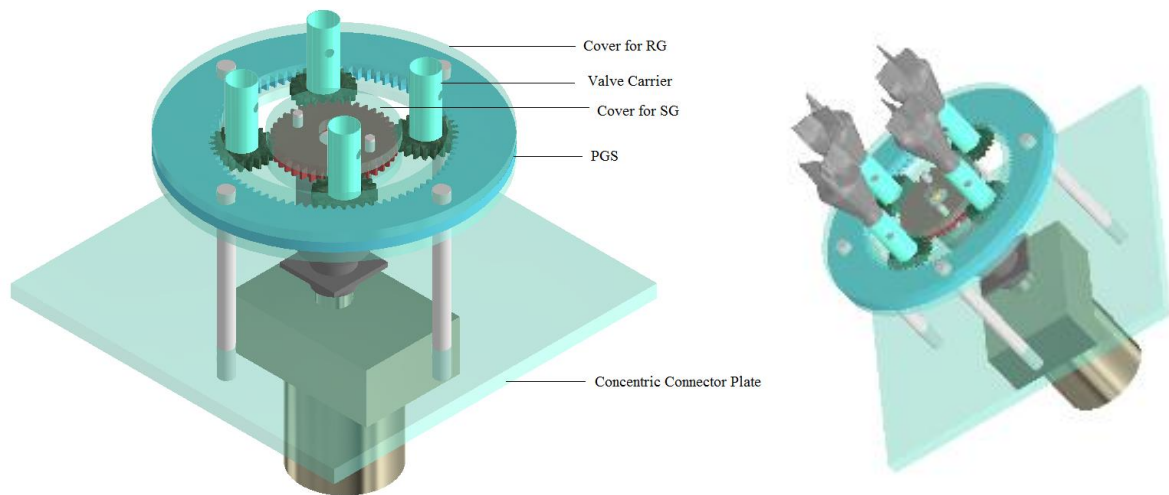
On the left explanation of the CAD components of the SD: RG: ring gear, SG: sun gear, PGS: planetary gear system. On the right demonstration of the inclined SD, including valve molds.
